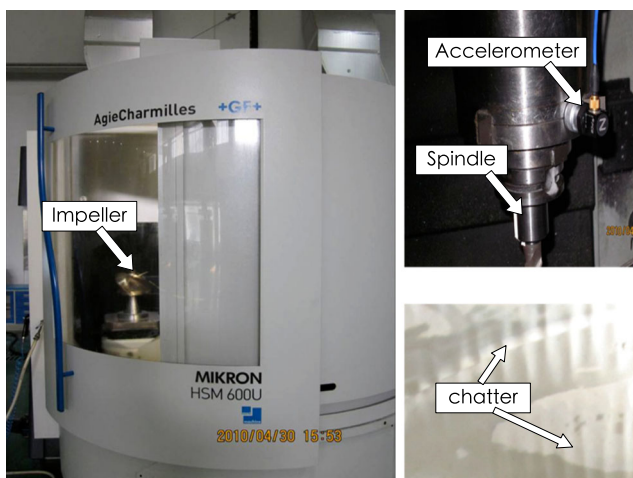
Experimental setup for impeller milling experiments. a Mikron HSM-600U. b Installment of accelerometer PCB 356A16. c Cutting chatter impacts
